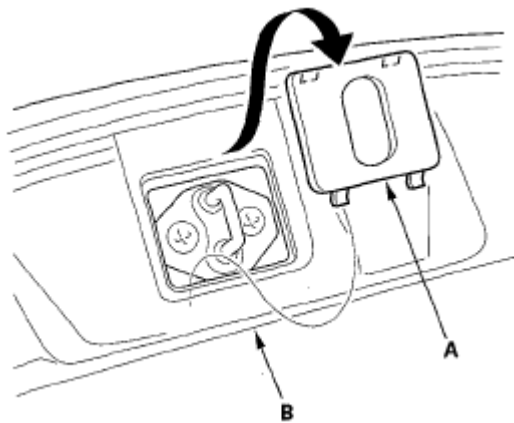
Identifying Striker Cap Of Rear Trim Panel
